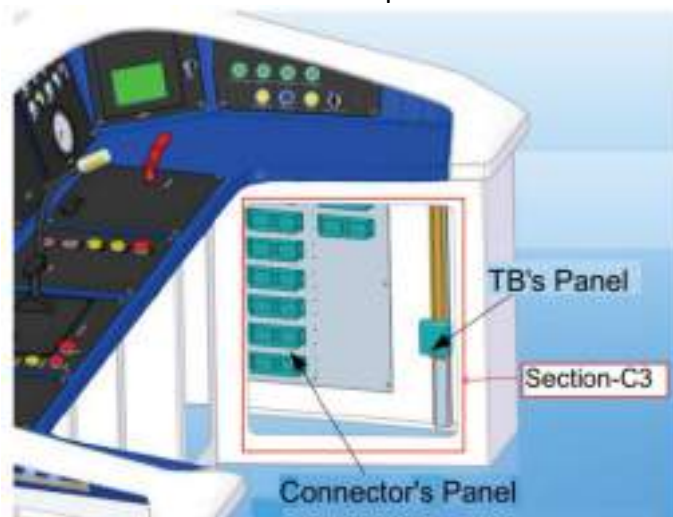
Bottom Left side components of Drivers desk (Section-C3)
